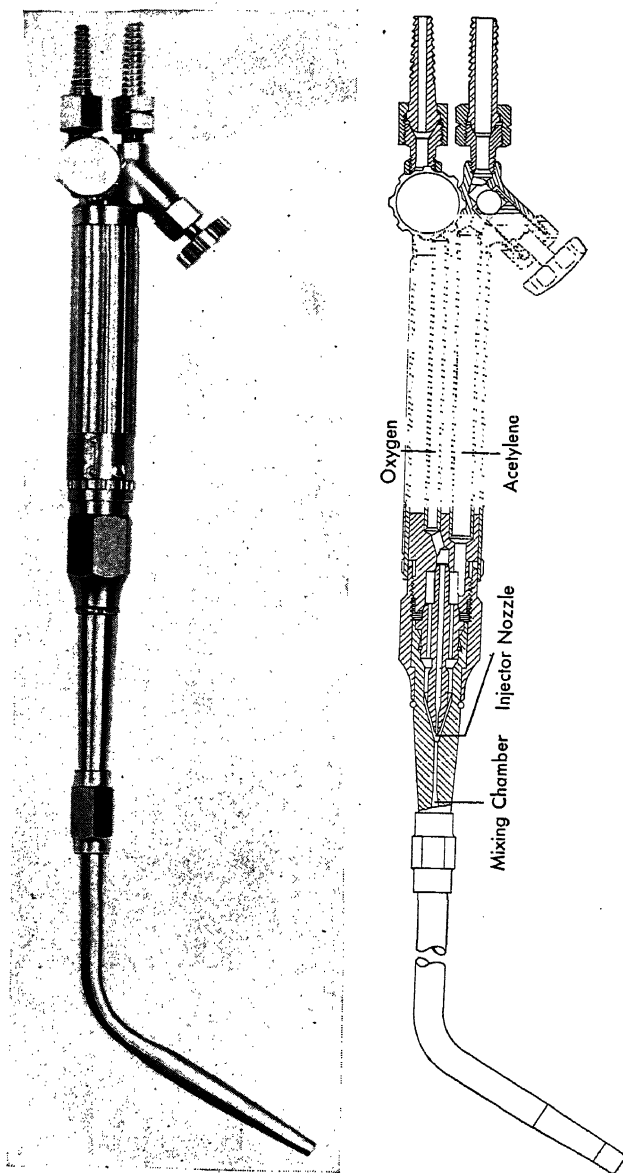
Welding torch. (Courtesy of Linde Air Products Co.)
